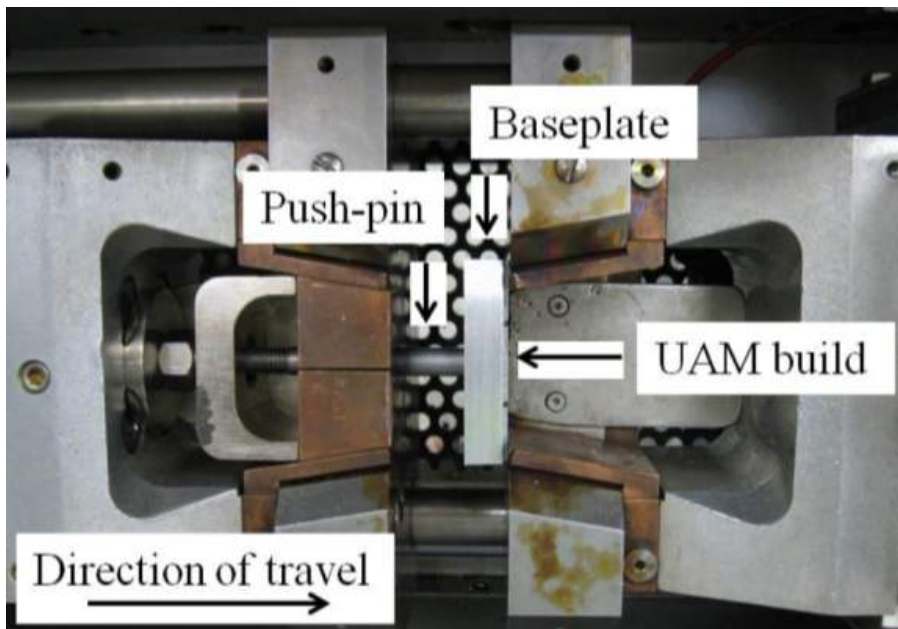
Push pin test for testing UAM welded layer bonding.
